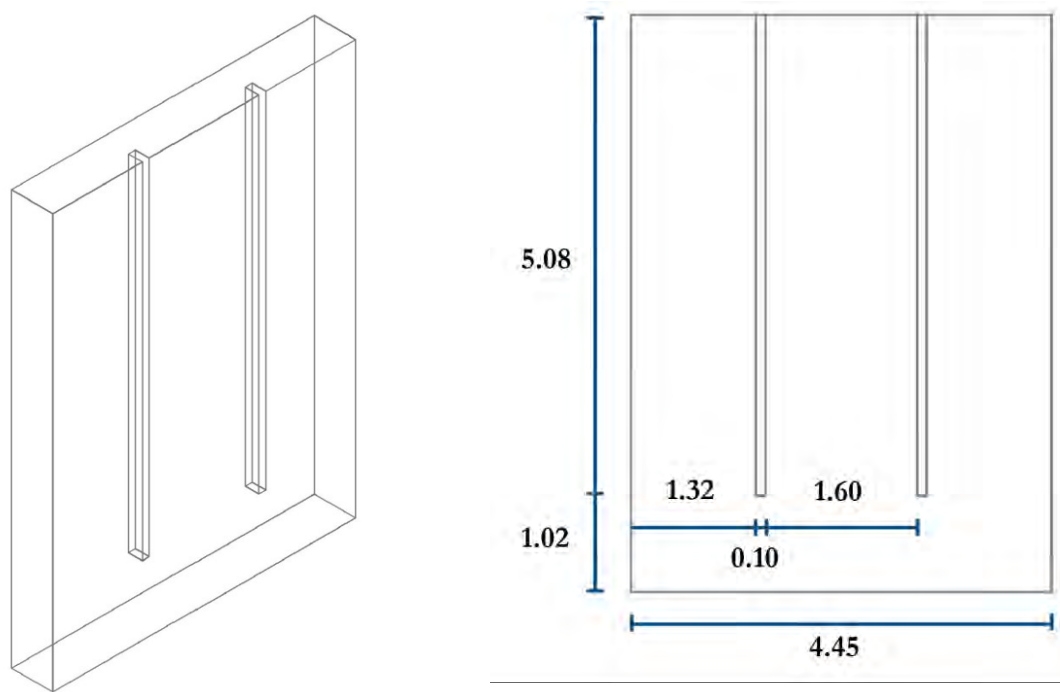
Isometric view and dimensions in centimeters (top view) of the electrode holder
